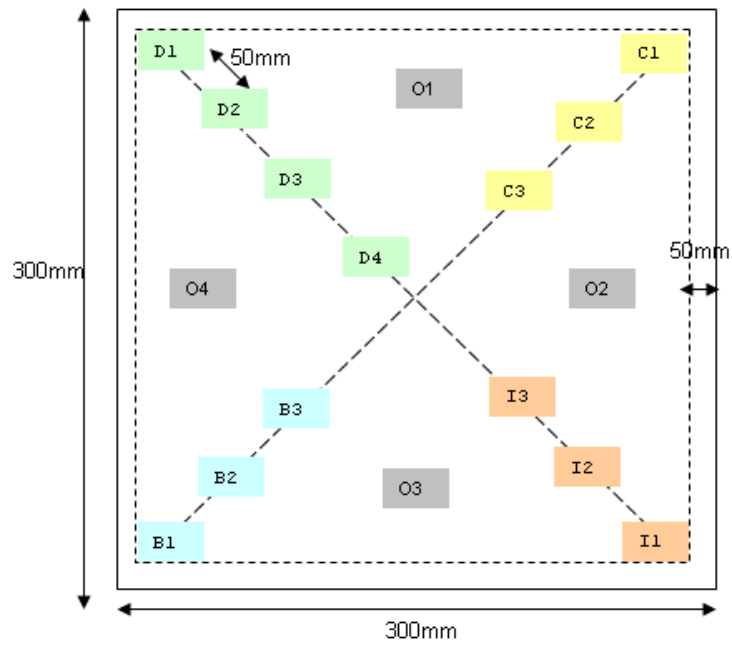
Stage 1 (300mmx300mm) CFRP & GFRP samples with defects - D: Delamination; I: Impact; C: Countersink; B: Burned drill hole; O: Secret defects
